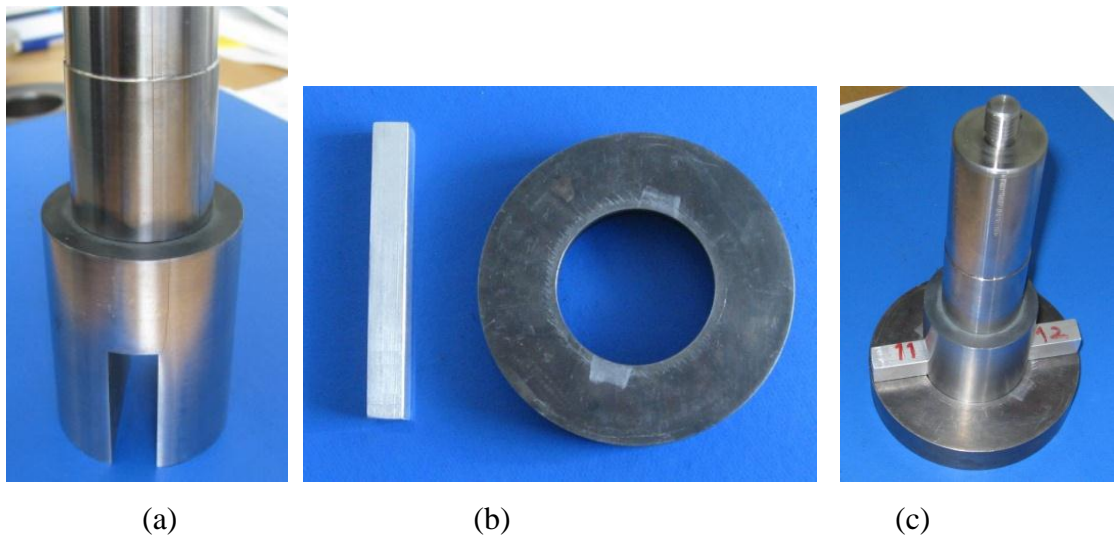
Tooling designed and applied for small sized bar shearing experiments: (a) Punch with slot to insert specimen into, (b) Bar specimen (Al) and lower ring-shaped cutting die, (c) Configuration of dies and specimen at beginning of shearing.
